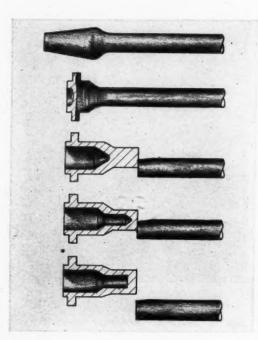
Above—Sequence used in machine upsetting steel marine engine cylinder barrels. Replacing conventional forging methods, these barrels were machine upset in four passes in one heat, reducing by almost 60 per cent, the previous rough forging weight. Hole in end is for handling the 4%-inch diameter by 17%-inch long billet
